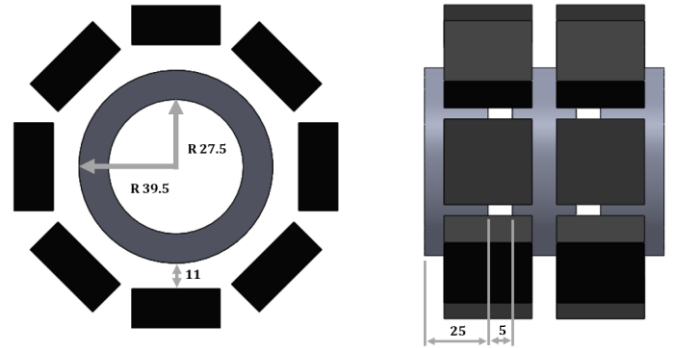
Geometry and dimensions of the new SMB design for rotor D5.
